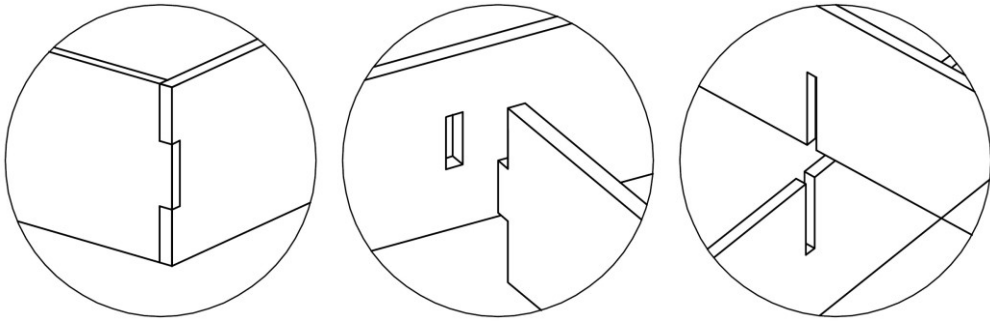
Joints for sheet metal parts. (left) finger joint, (center) slot and tab joint, (right) half lap joint (adapted from [70])
